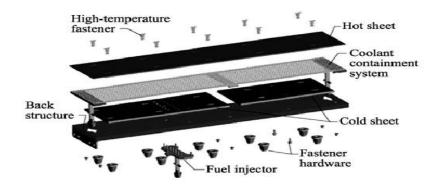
Exploded view of the cooling structure consisting of C / SiC composite panels and Ni alloy tubes
